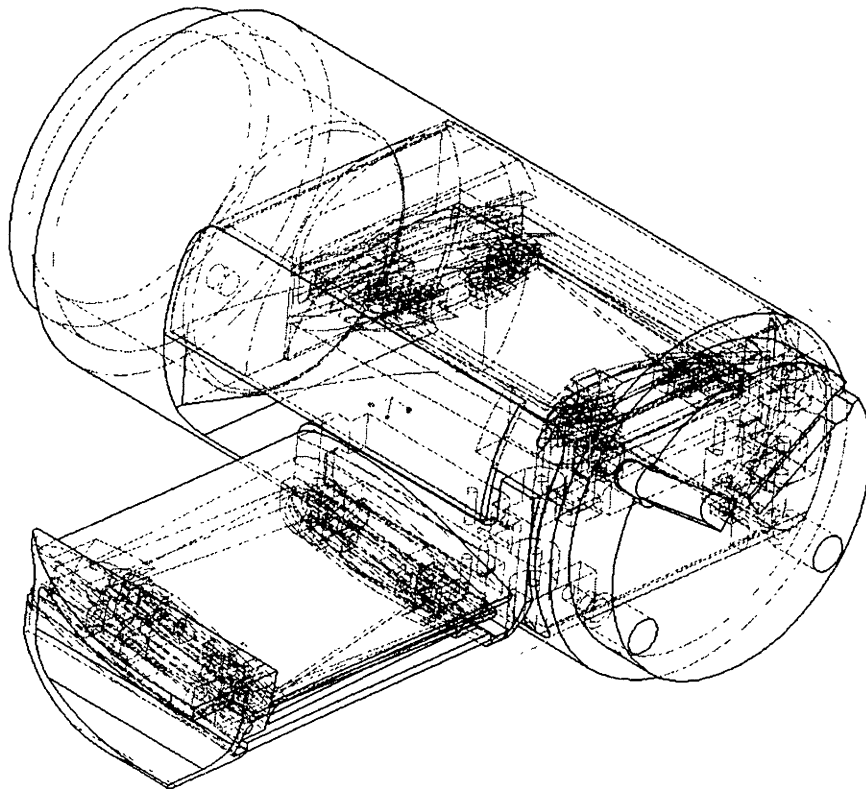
WIREFRAME OF WINGS AND WING MODULE
